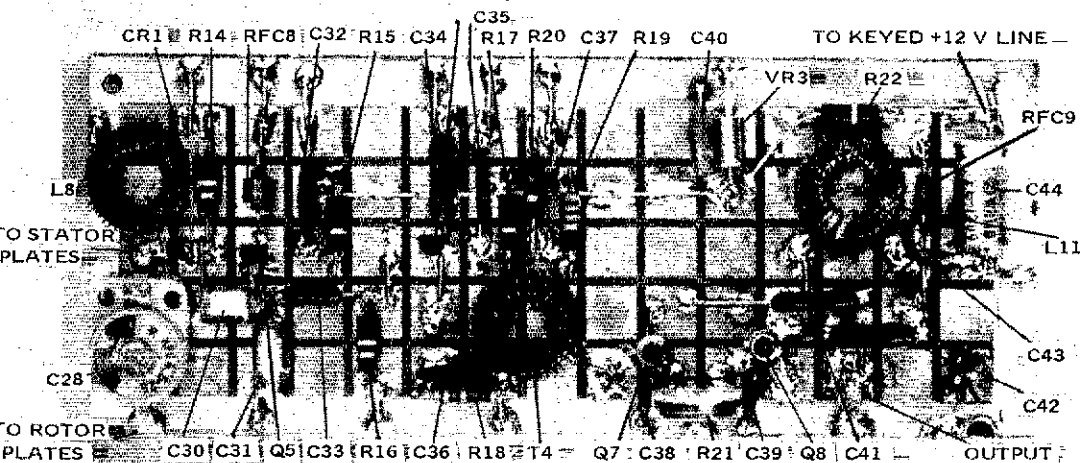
Scale drawing of the VFO circuit board showing parts layout. The isolated-pad board is glued to a slightly larger piece of copper-clad board. The latter serves as a ground plane for the composite circuit.
